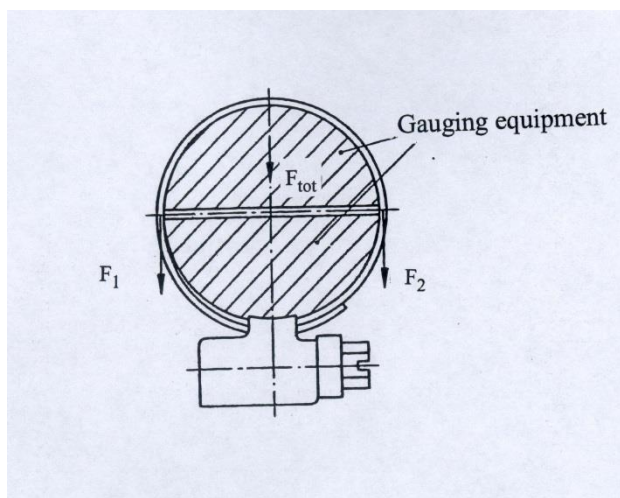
Equipment used when investigating band tension.  $F_{tot} = F_1 + F_2$
